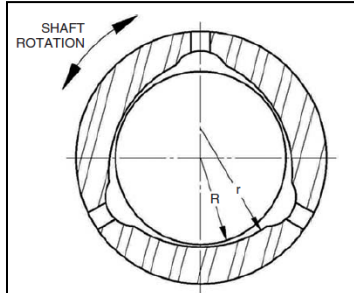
27 Three-lobe preloaded journal bearing. [18]
